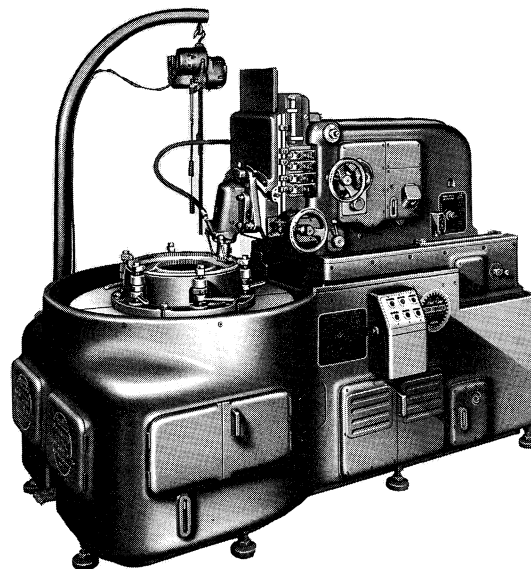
Model GCQ-36 in. Red Ring gear shaver processing an internal gear.
